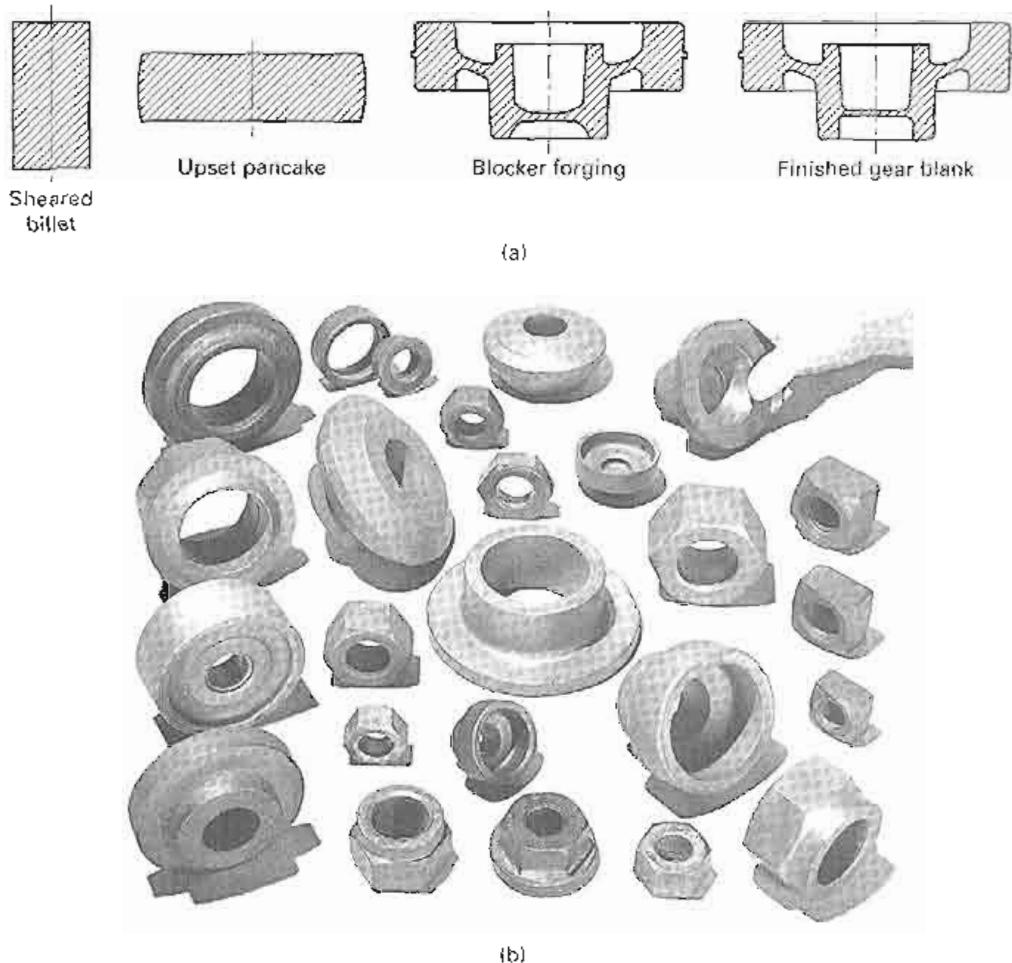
(a) Typical four-step sequence to produce a spur-gear forging by automatic hot forging. The sheared billet is progressively shaped into an upset pancake, blocker forging, and finished gear blank. (b) Samples of ferrous parts produced by automatic hot forging at rates between 90 and 180 parts per minute. (Courtesy of National Machinery Company, Tiffin, OH.)
